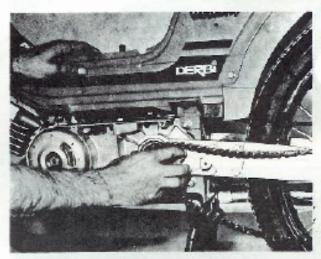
Remove Sprocket and chain. Let chain rest on swing arm.
